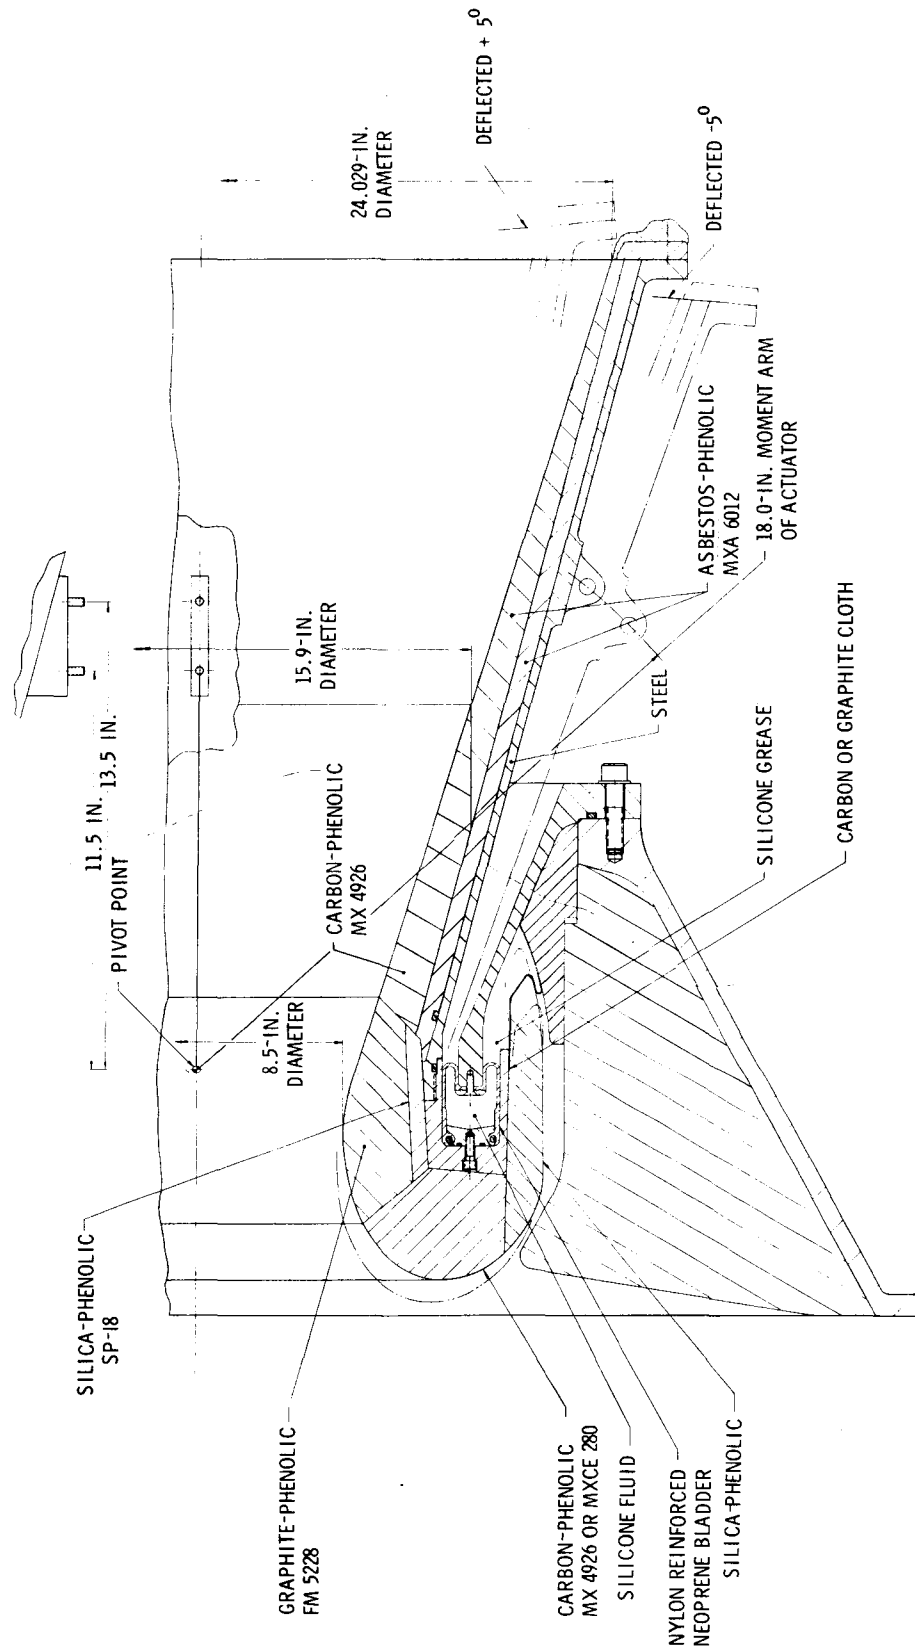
TECHROLL Seal Movable Nozzle for Second-Stage Minuteman
